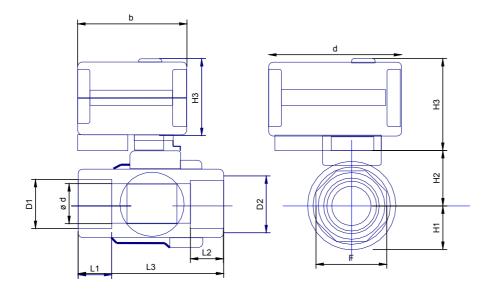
Mechanical dimensions of the CWX valves.
